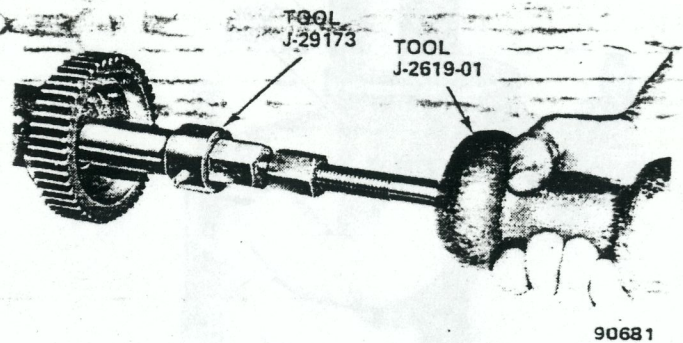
D-33 Mainshaft Pilot Bearing Removal
